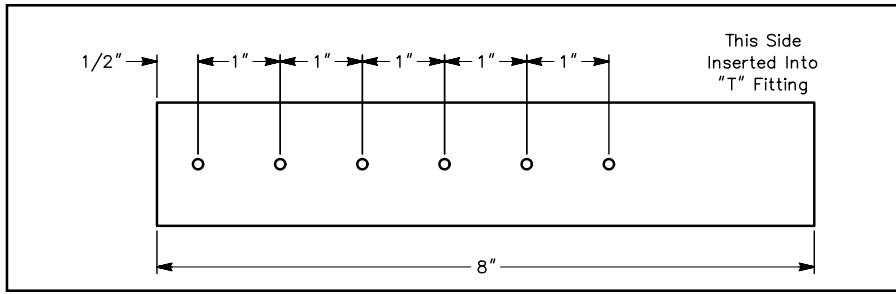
This short PVC pipe is what will actually support your loop wires. Two of these will go into each of the three T fittings on the ends of each pipe. Two more will go into the cross fitting at location I in Figure 1. Measure a half-inch from one end and drill a hole all the way through the pipe that is large enough to pass the No. 14 wire. Drill five more holes through the pipe, each one-inch apart.
